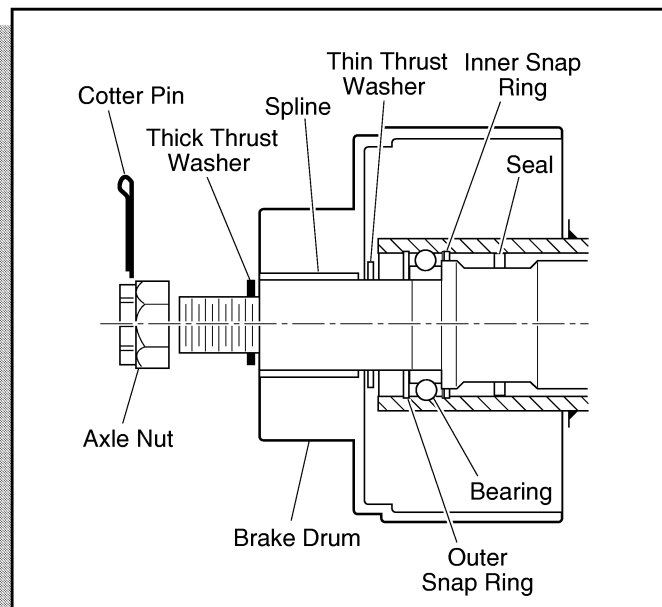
Cut Away of Outer Bearing and Brake Drum
